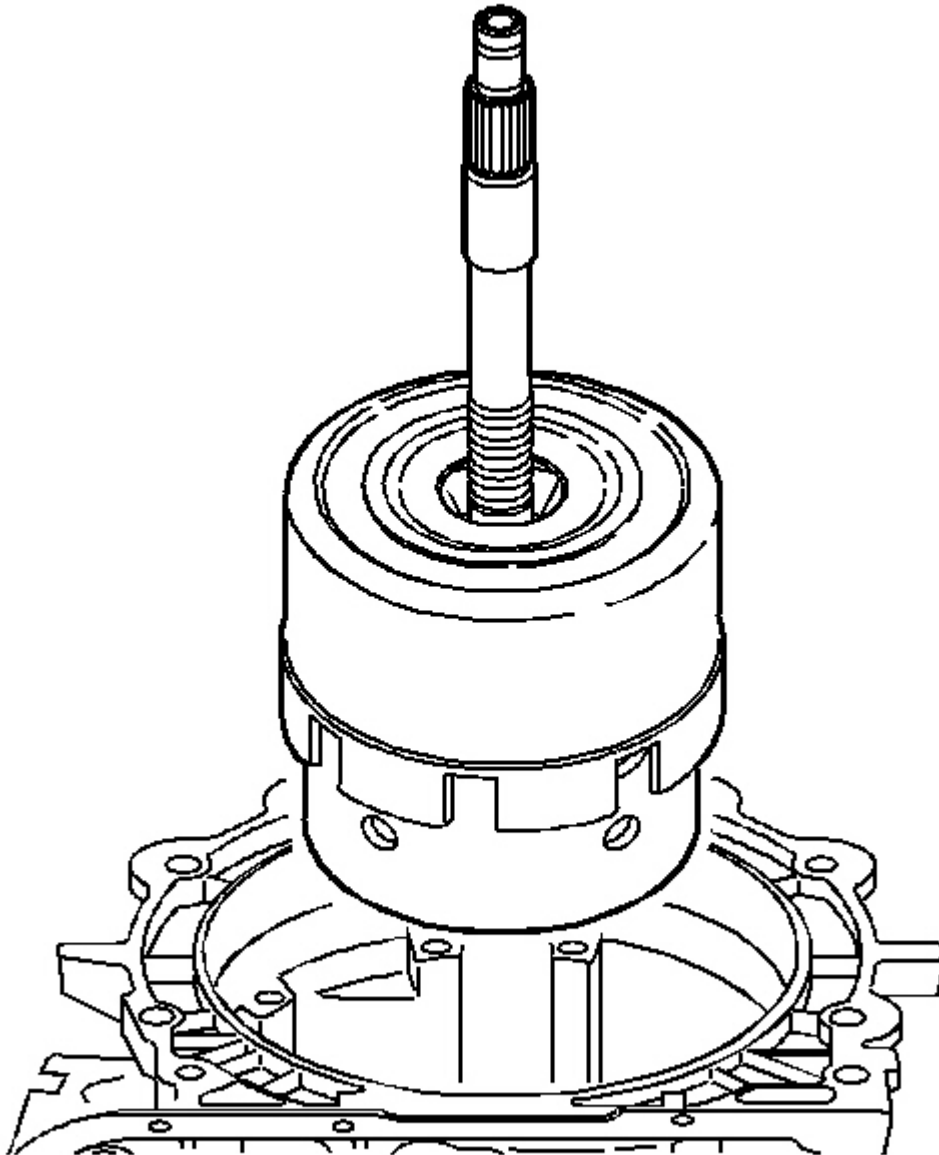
Identifying Reverse Input & Input Clutch Assembly
